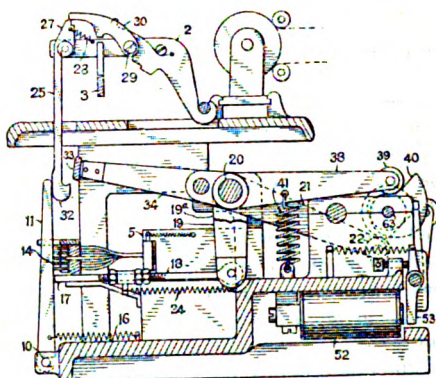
Murray Multiplex Printer: Sectional Elevation.
